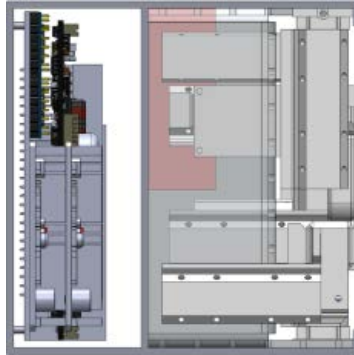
Cross section of RSat spacecraft showing A-frame and front "porch" design.
